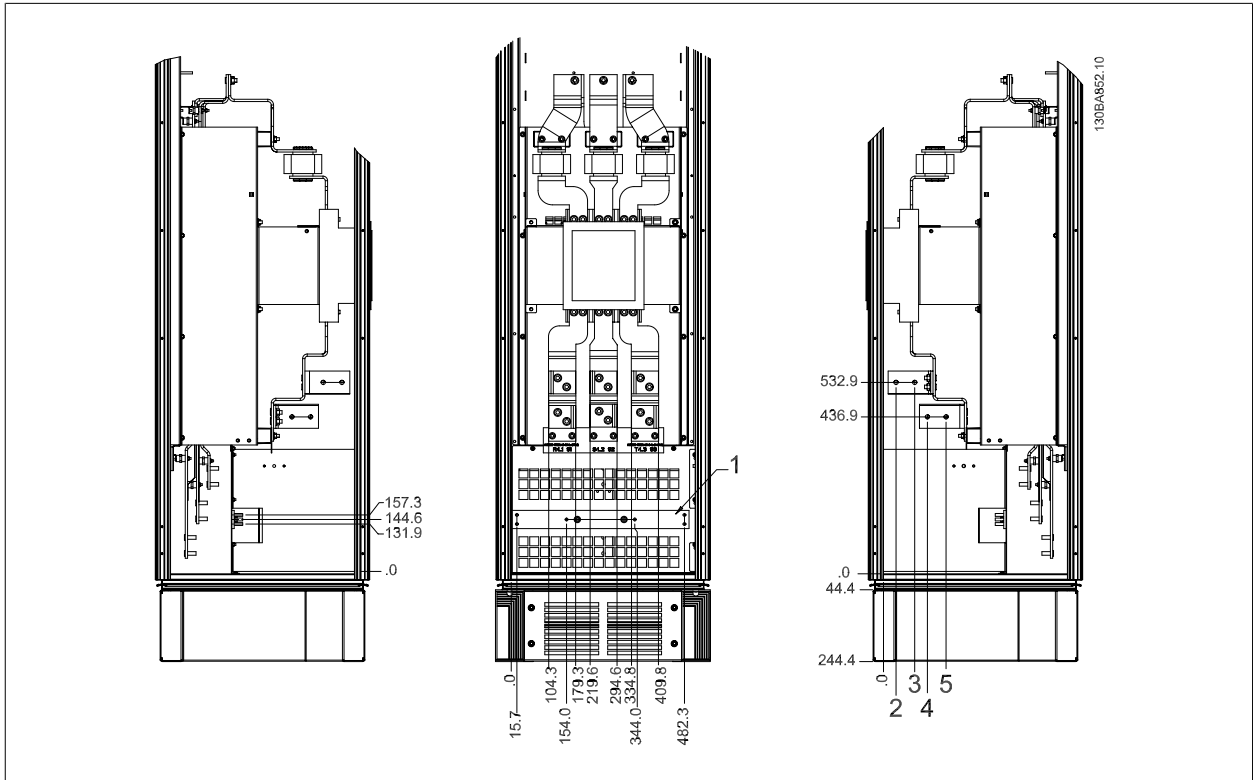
Terminal locations - Options Cabinet with circuit breaker/ molded case switch (Left side, front and right side view)
